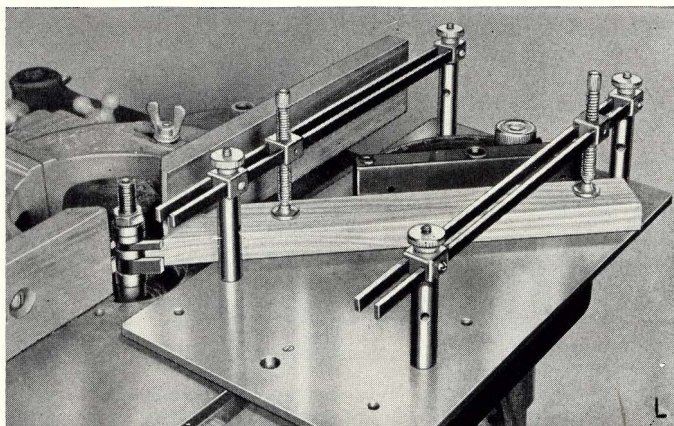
Using the shaper sliding jig at 45 degrees to make the end cut in a mitered frame. The jig should always be used for end cutting.
